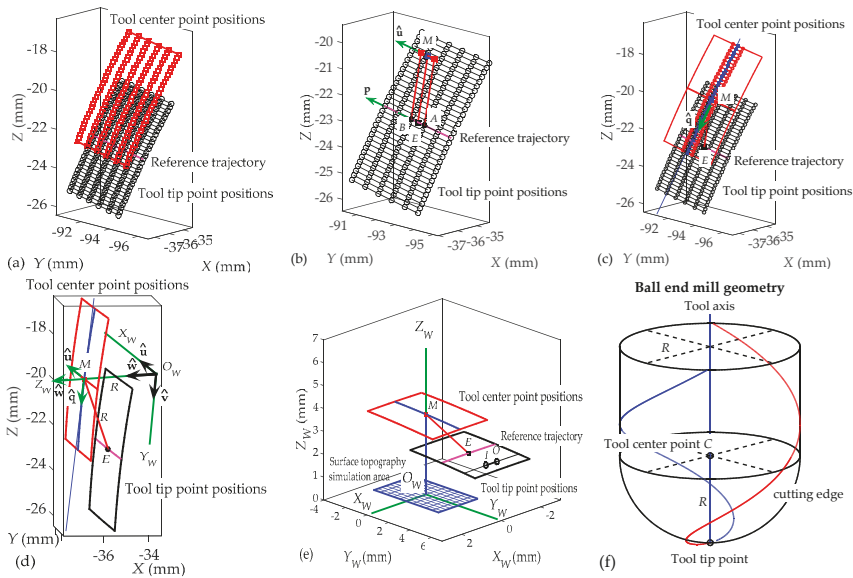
Tool center points (red) in relation to tool tip points (black) and to tool axis orientation and local reference system $O_W X_W Y_W Z_W$ attached to workpiece (gear tooth). (a) Tool center points position; (b) M point definition; (c) Reference trajectory; (d) Tool tip and center point positions; (e) Reference for the prediction of the topography generated in the surface of gear teeth; (f) Ball end mill geometry.
